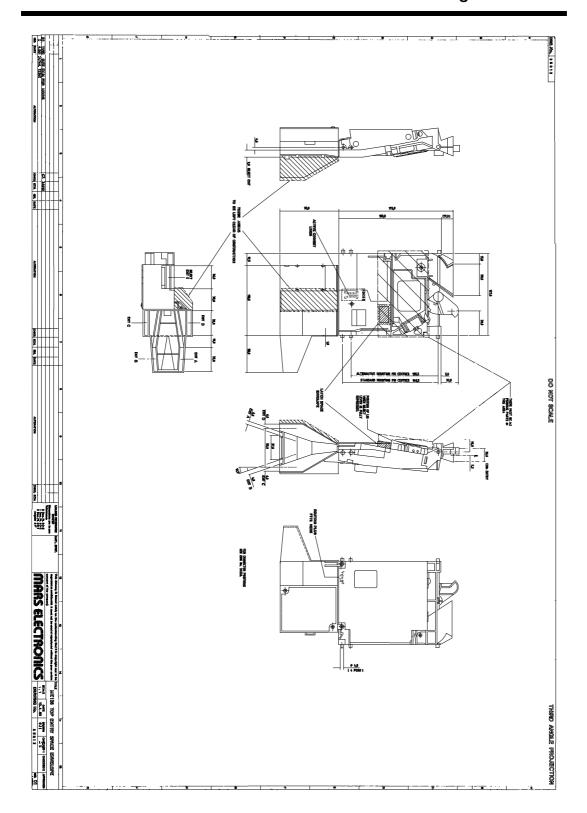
CF129 system installation dimensions. (Fitted with Short manifold)
